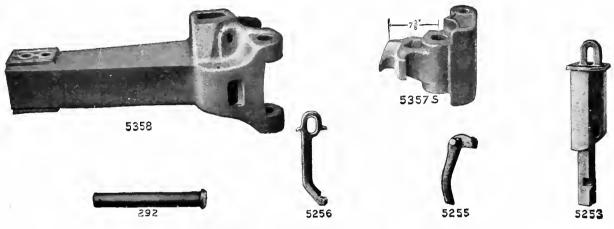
Common Styles of Coupler Shanks for Different Draft Gear Arrangements. The National Malleable Castings Co.
